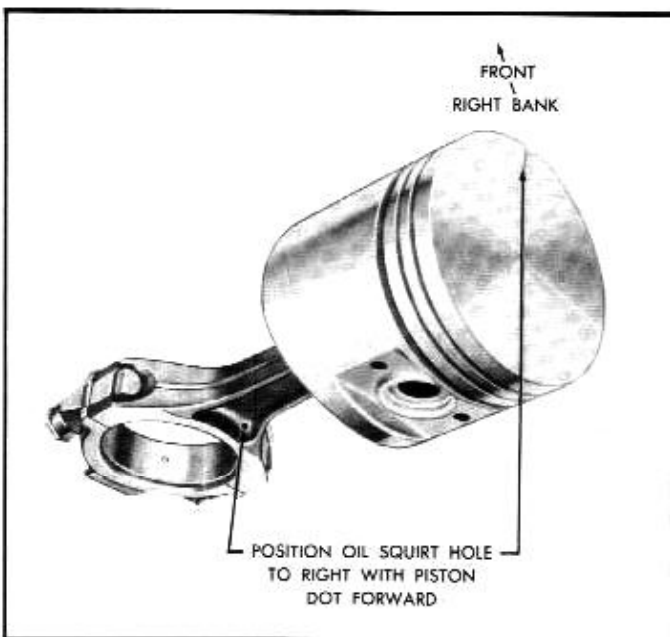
C-85—Position of Piston and Connecting Rod Squirt Hole — Right Bank — Typical
